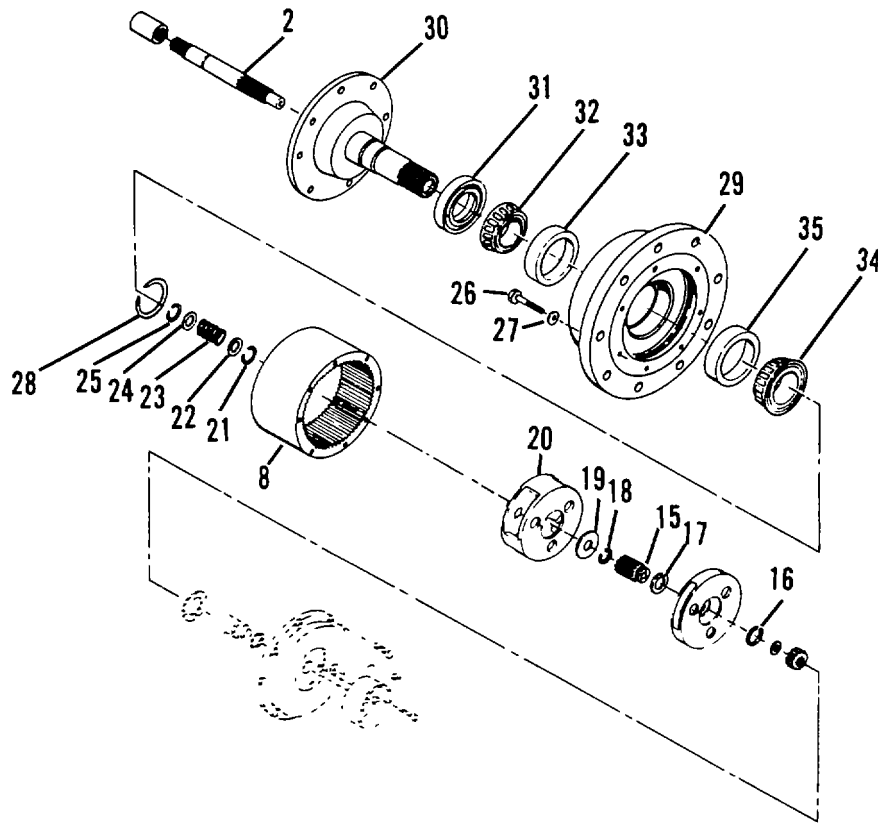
Drive Hub Assembly (Sheet 2 of 3).
